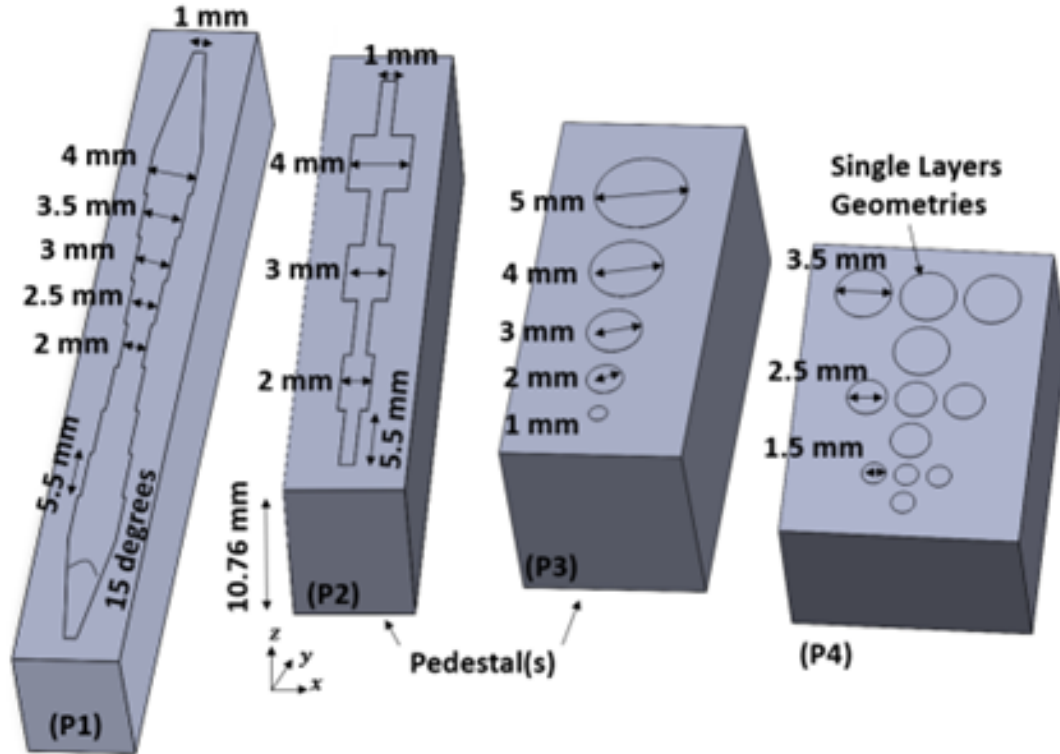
Examples of the single layer parts built on top of a 10.76 mm pedestal manufactured for the study.
